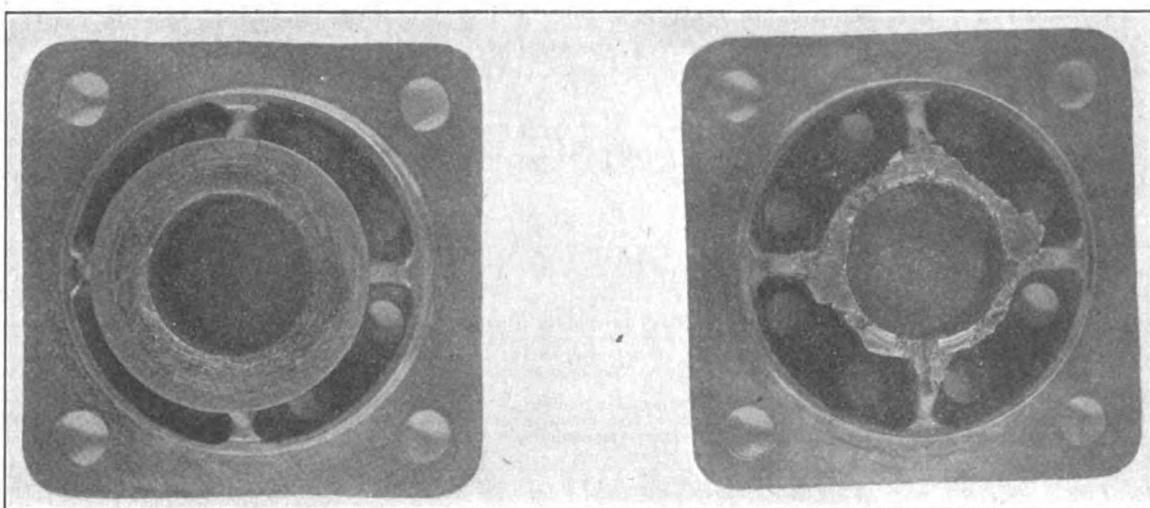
Camshaft drive-shaft lower bearings (upper) after preliminary runs on dynamometer.
